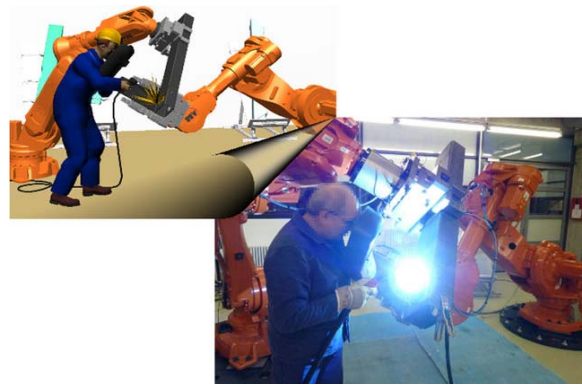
The multi-robot system assists the worker in the welding process [11].
